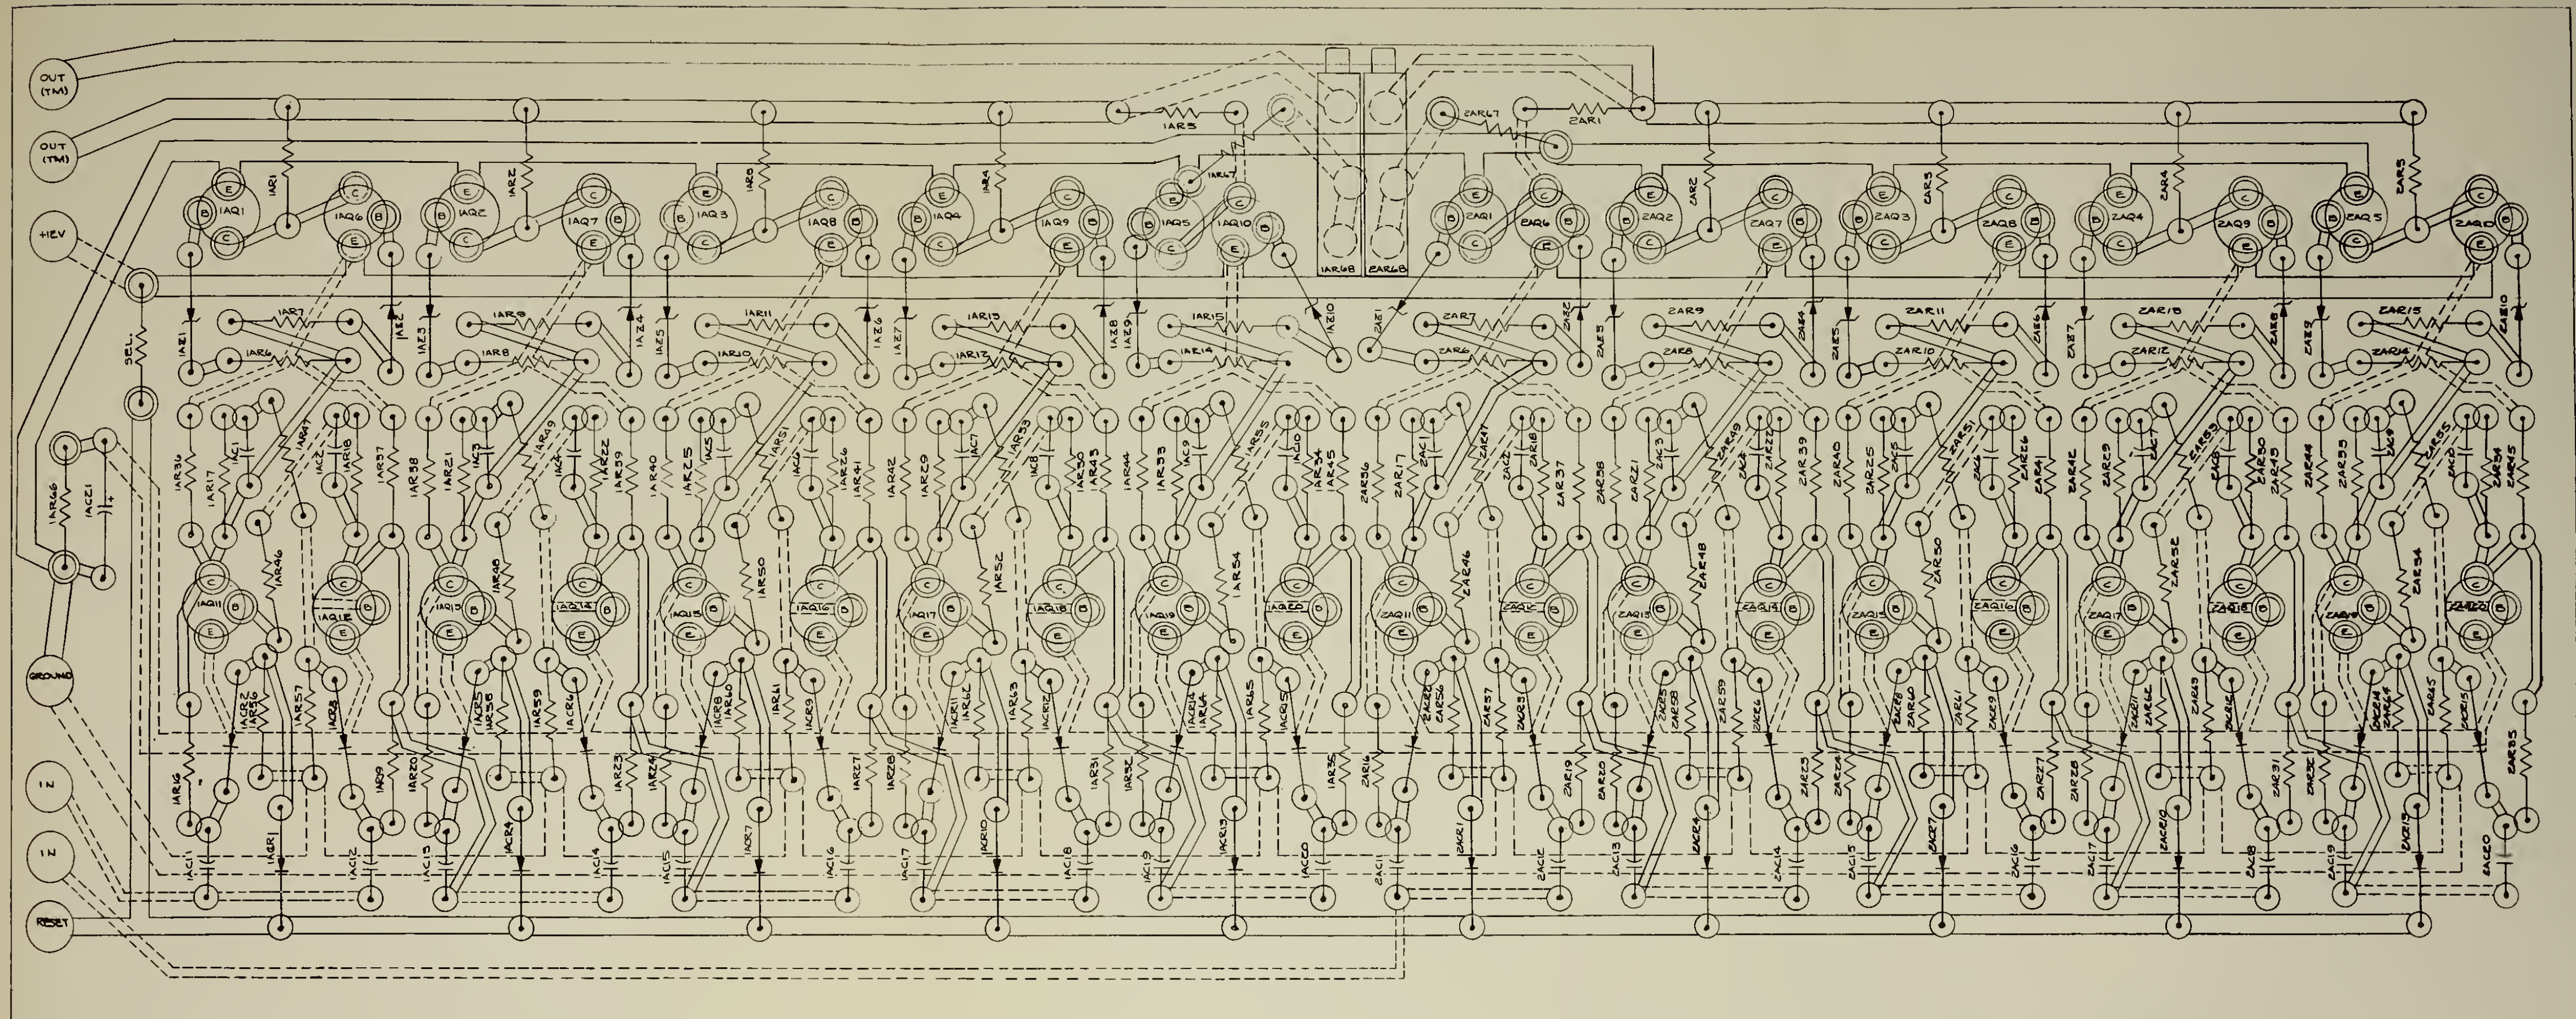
Typical Scaler PCB Layout (PCB 2, 4, and 6)
